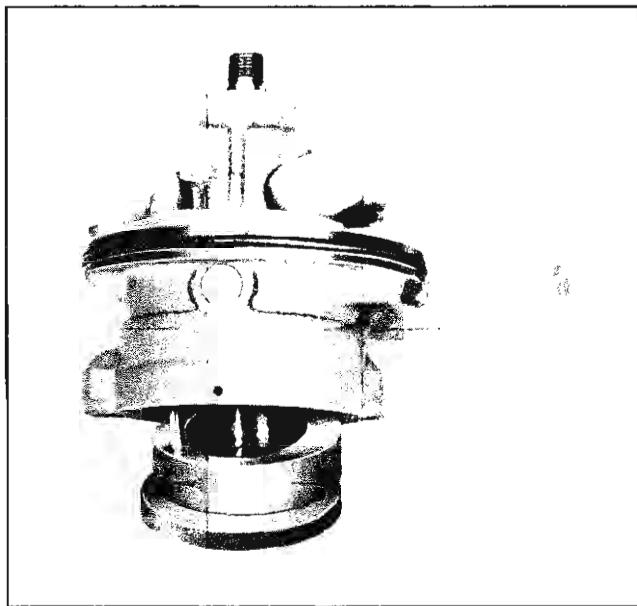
A-12 Pressure Plate and Rotor Ring Removed
